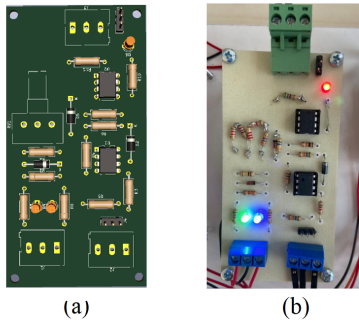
Designed (a) & assembled (b) PCBs of the sensing unit.
